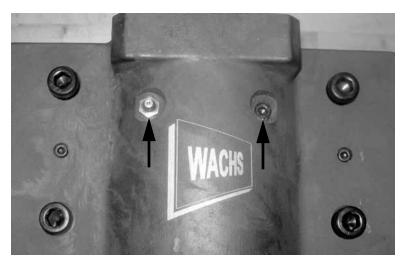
To grease the spindle, remove the plug (right) and apply grease through the fitting (left).
